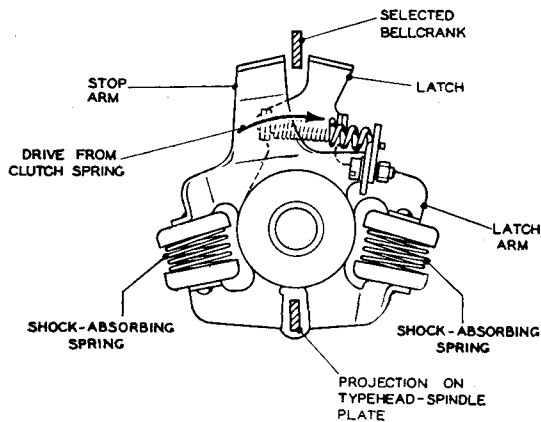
THE TYPEHEAD; ASSEMBLED.
